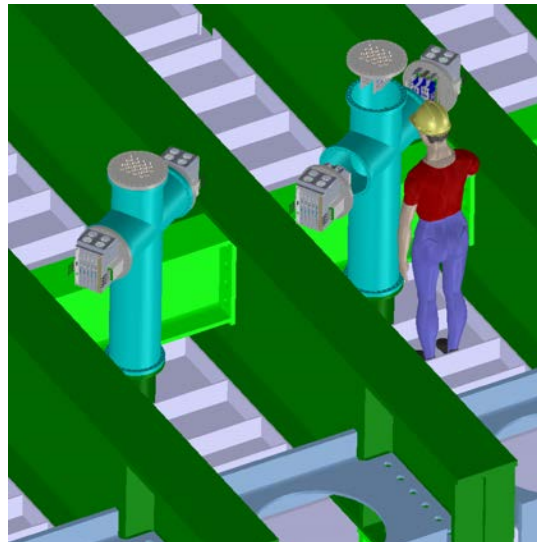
Installation of the crosses to which the TPC electronics warm readout and the PD cables are connected. In this figure the cryostat roof decking is not shown. During the cross installation a section of decking will be removed so people can access the required flanges and work at a comfortable height.
